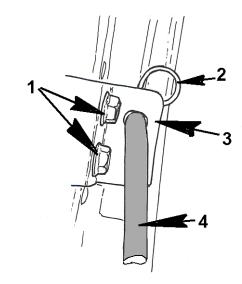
Upper Hood Torsion Bar Retaining Clip and Bracket
